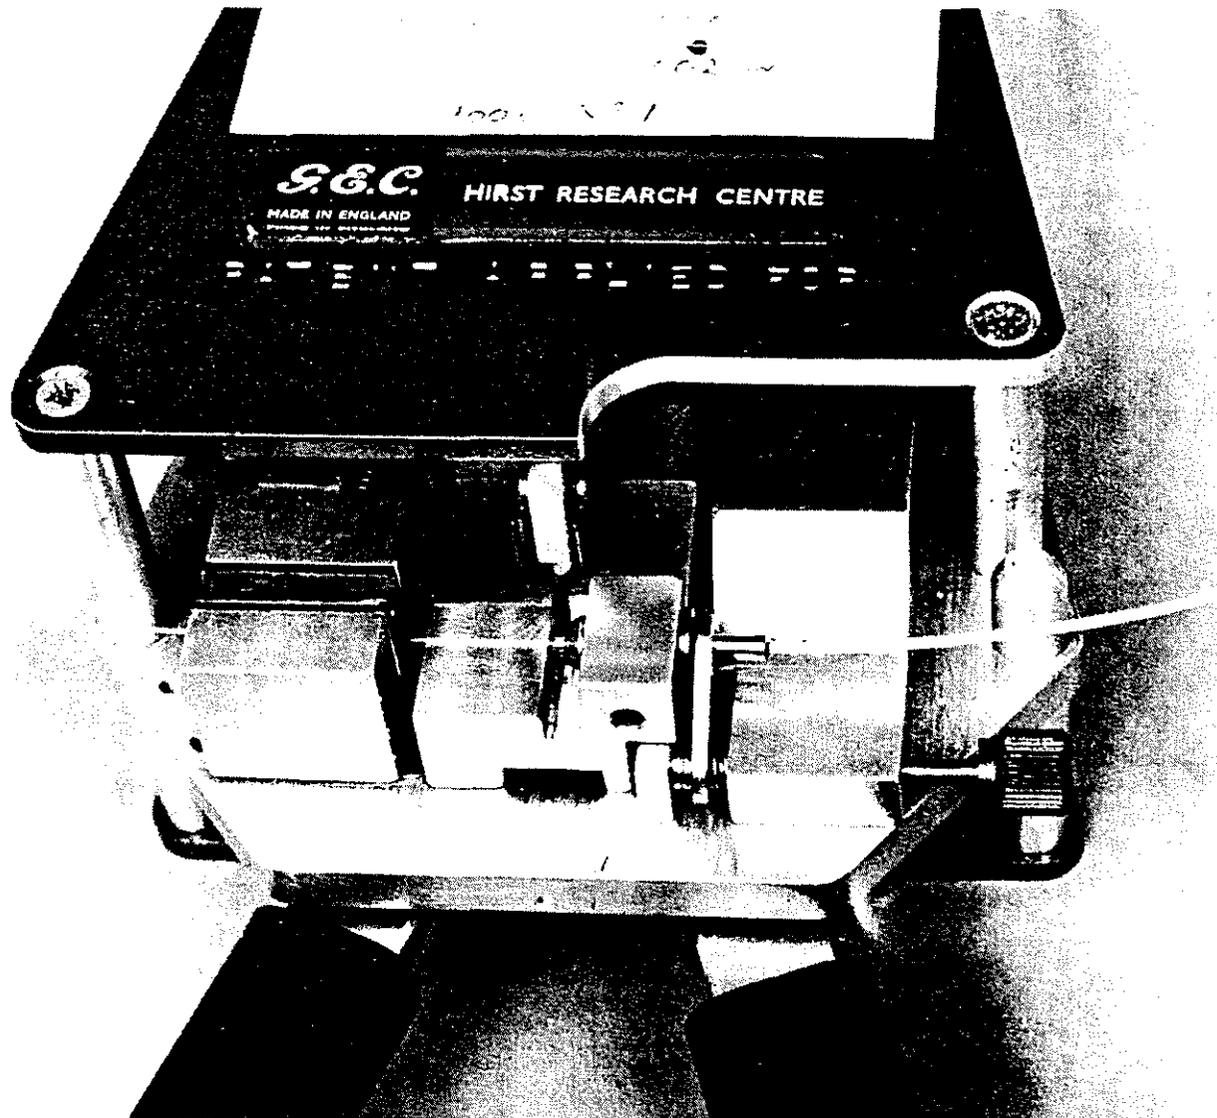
Fibre/Ferrule Assembly in Cleaving Tool Prior to Cleave
